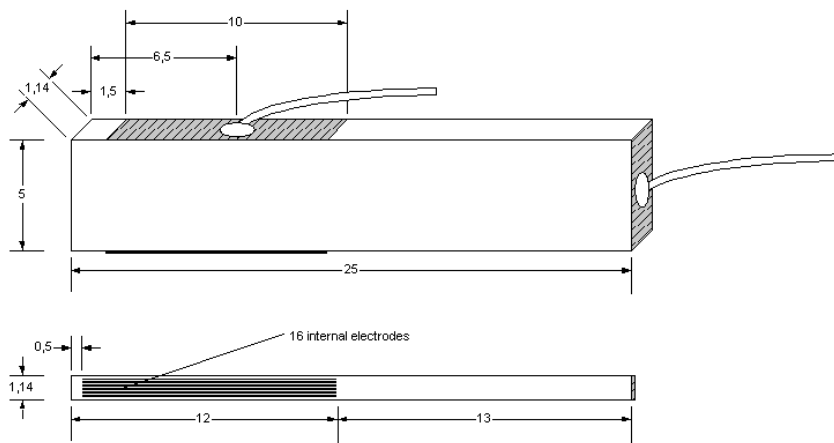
Dimensions of the Noliac Rosen type PT
